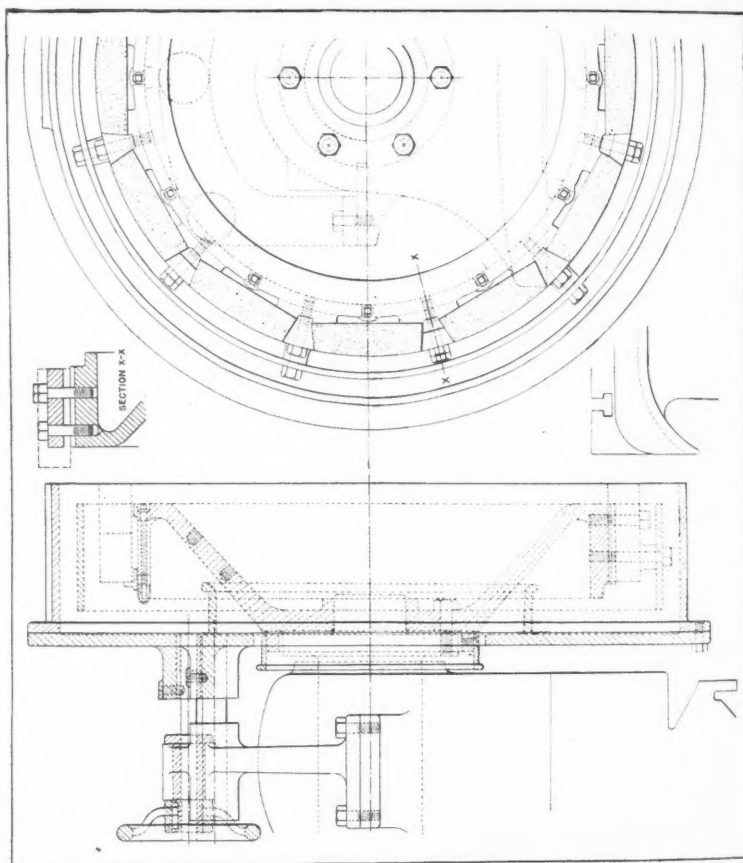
Grinding Wheel with Segments Clamped in Place by Wedges and Screws for Adjusting Endwise Positions
